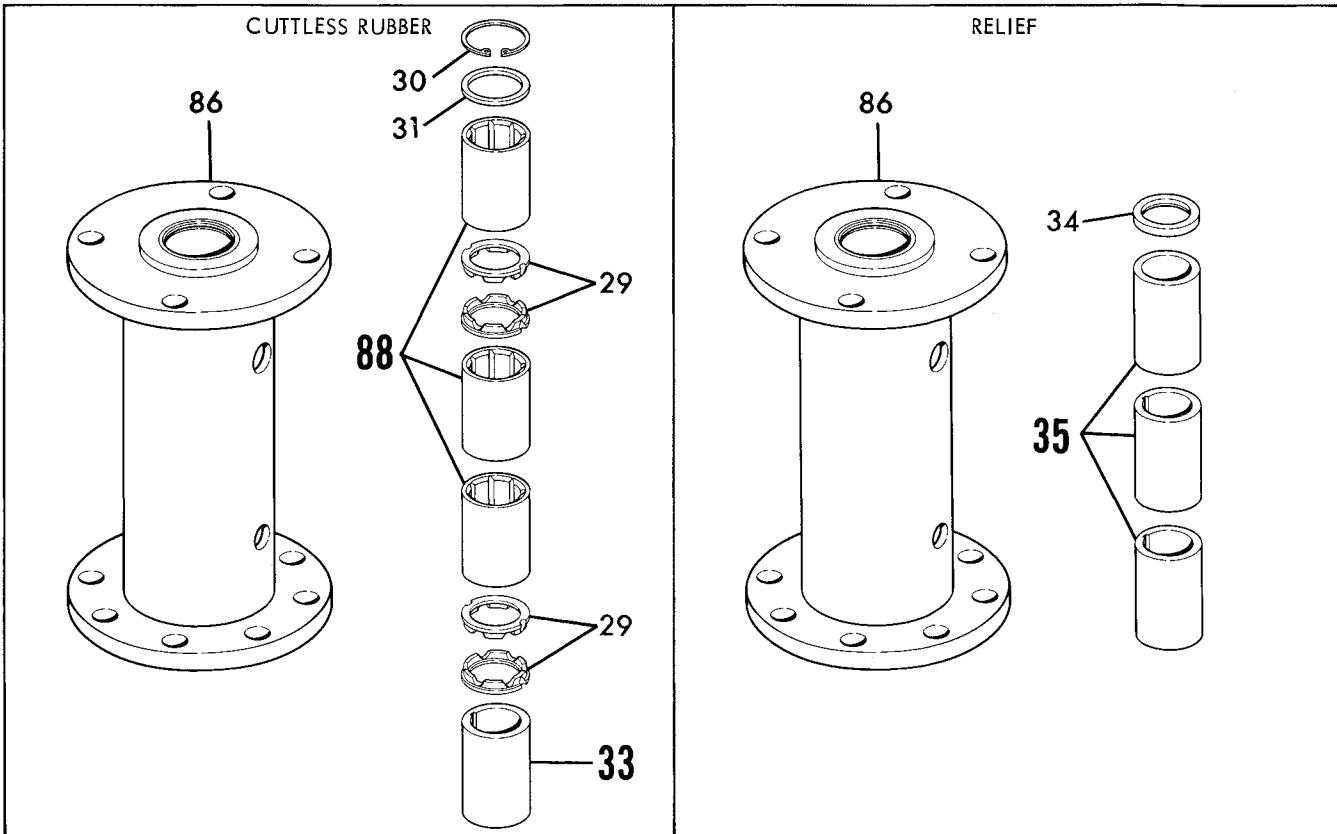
Model 641-642 Exploded View (Sheet 3 of 3)
